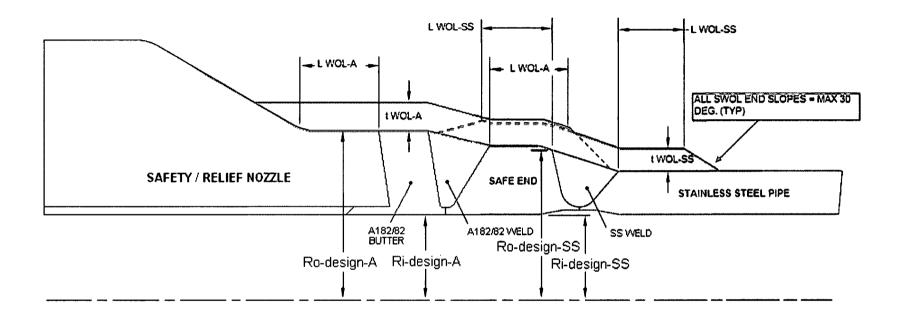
Sketch Showing Weld Overlay Design Parameters for the Safety/Relief Nozzles
